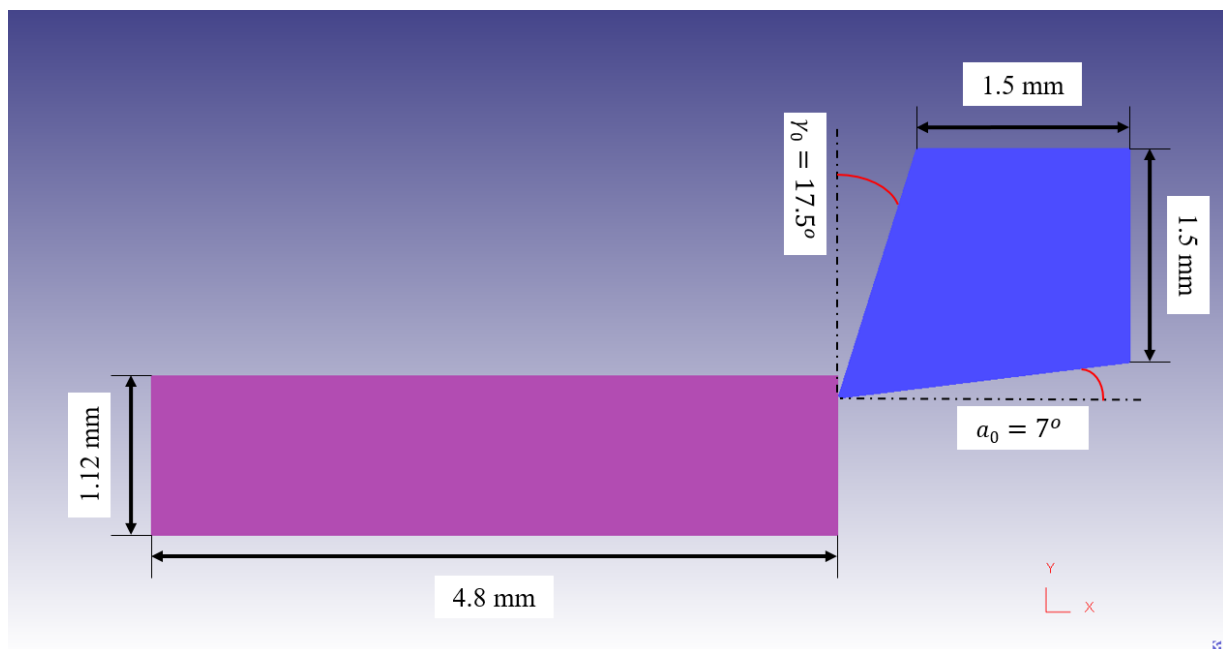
The geometry and dimensions of the tool and workpiece in FE modeling.
